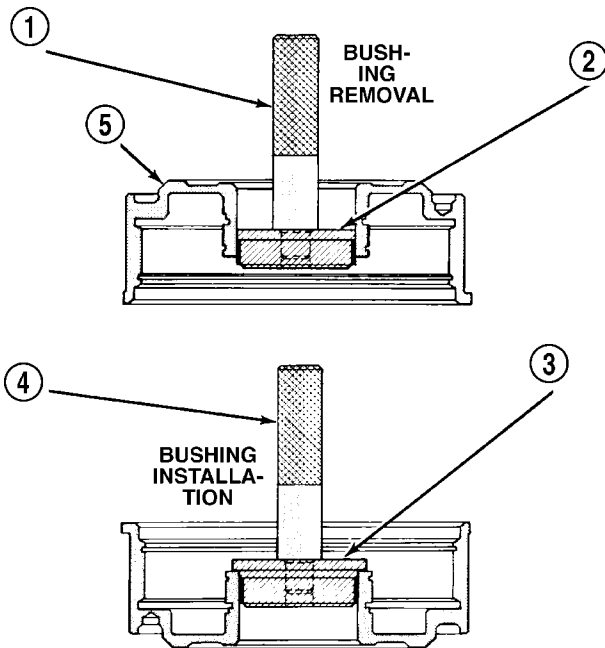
Front Clutch Retainer Bushing Replacement Tools
